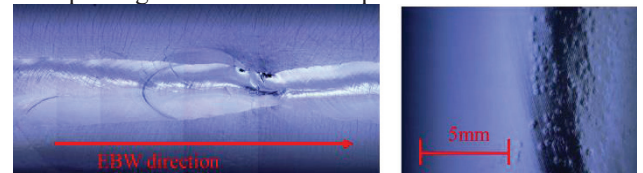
Welding bead at repaired position observed from inside (left) and strange structure (right).
